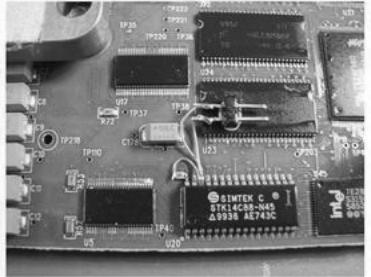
Close-up of CPU Board Modification to U20 Chip
